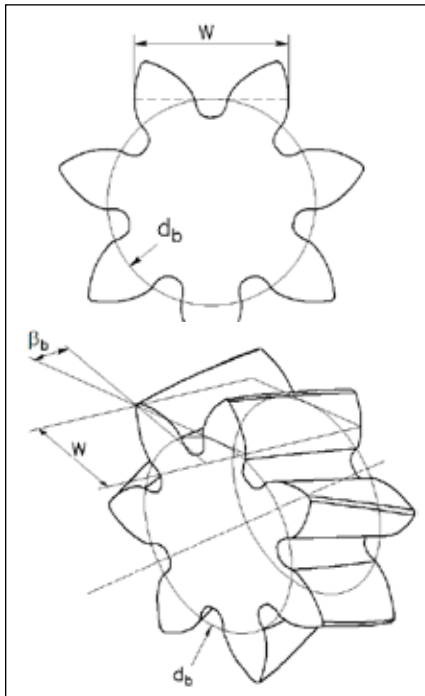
(Revised)—Span measurement; a—for spur gear; b—for helical gear
